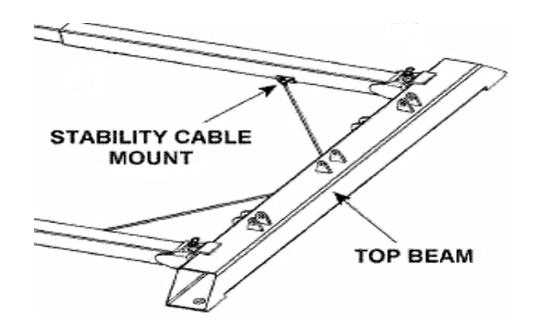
Steel cables added between the upper beam and vertical tubes
